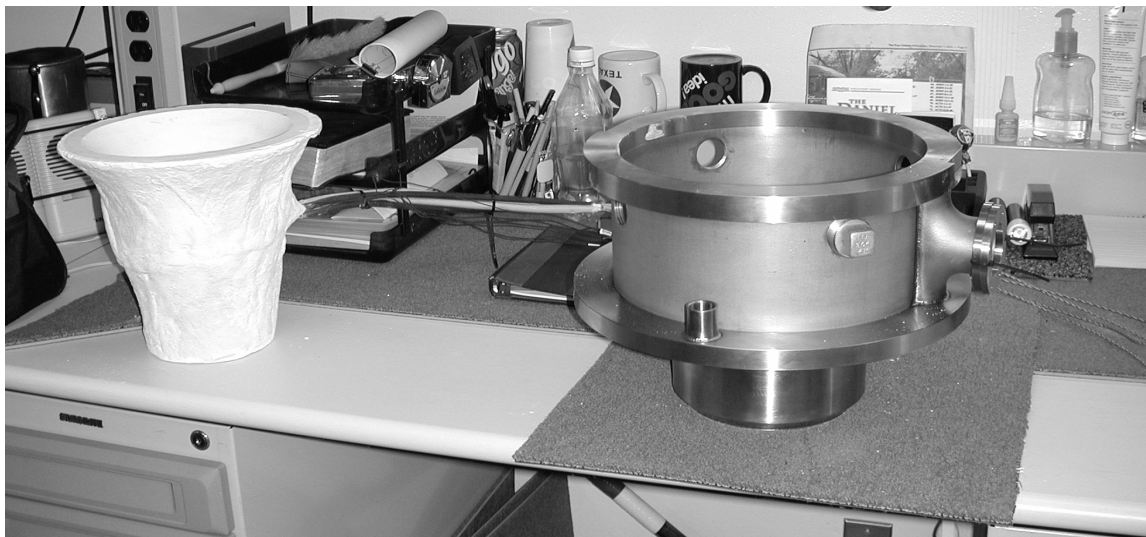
Heater (upper and lower combined) and weldment (located on right).
